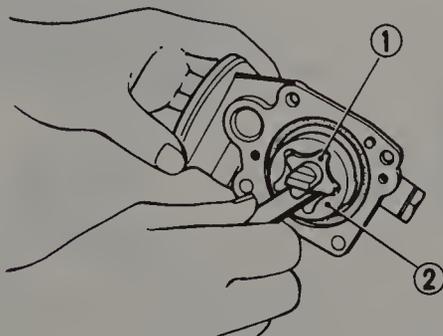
Checking drive gear-to-rotor tip clearance with a feeler gauge (Sec 9)
